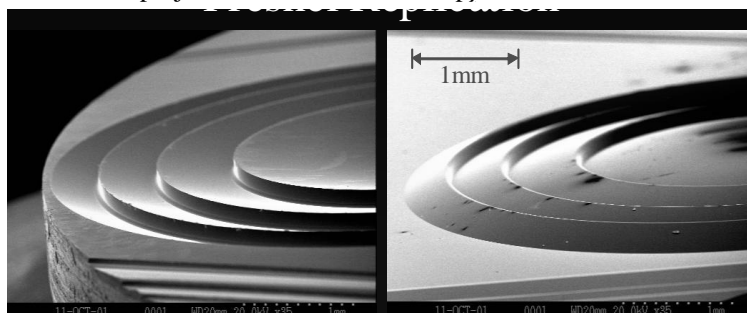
(a) Diamond machined mold and (b) molded PMMA Fresnel optic.
